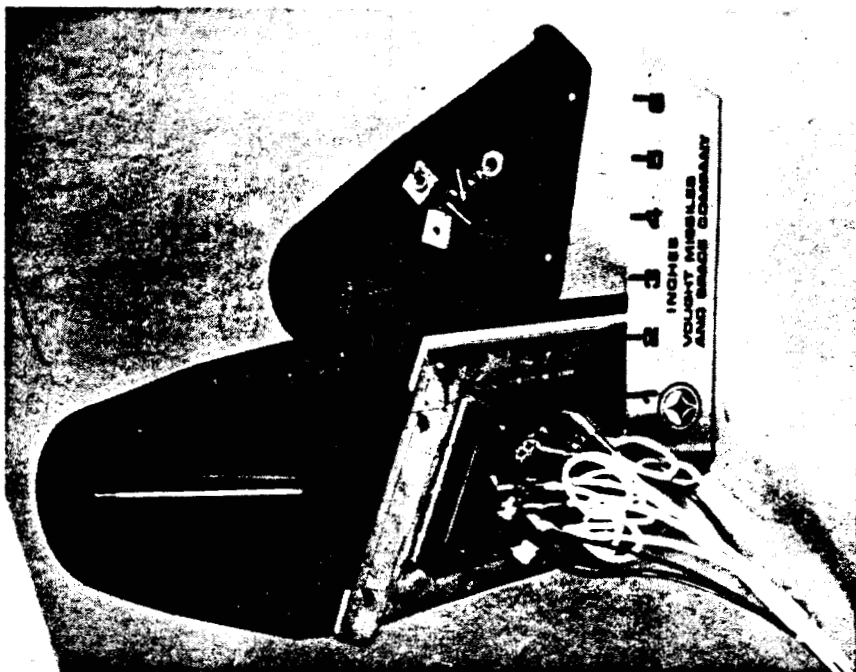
BARE WING TIP PANEL ASSEMBLY SHOWING THERMOCOUPLE INSTALLATION
